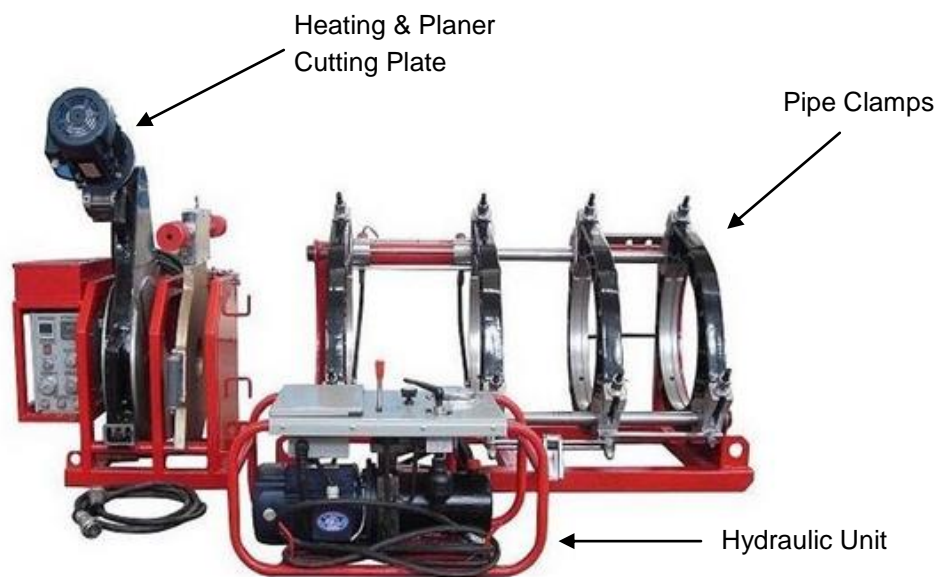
Semi Automatic Butt Fusion Welding Machine
